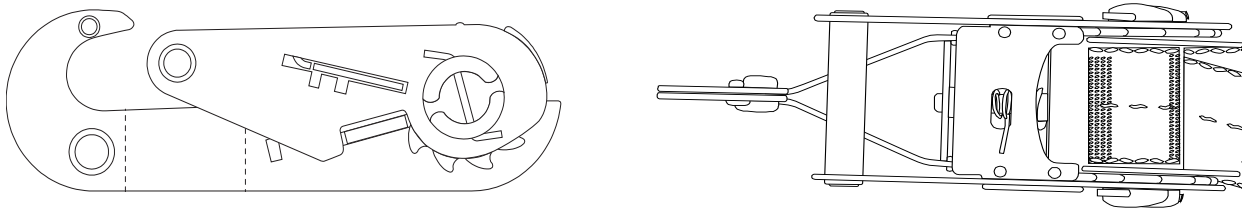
CGU-1/B adjustable hook assembly and tensioning mechanism.
